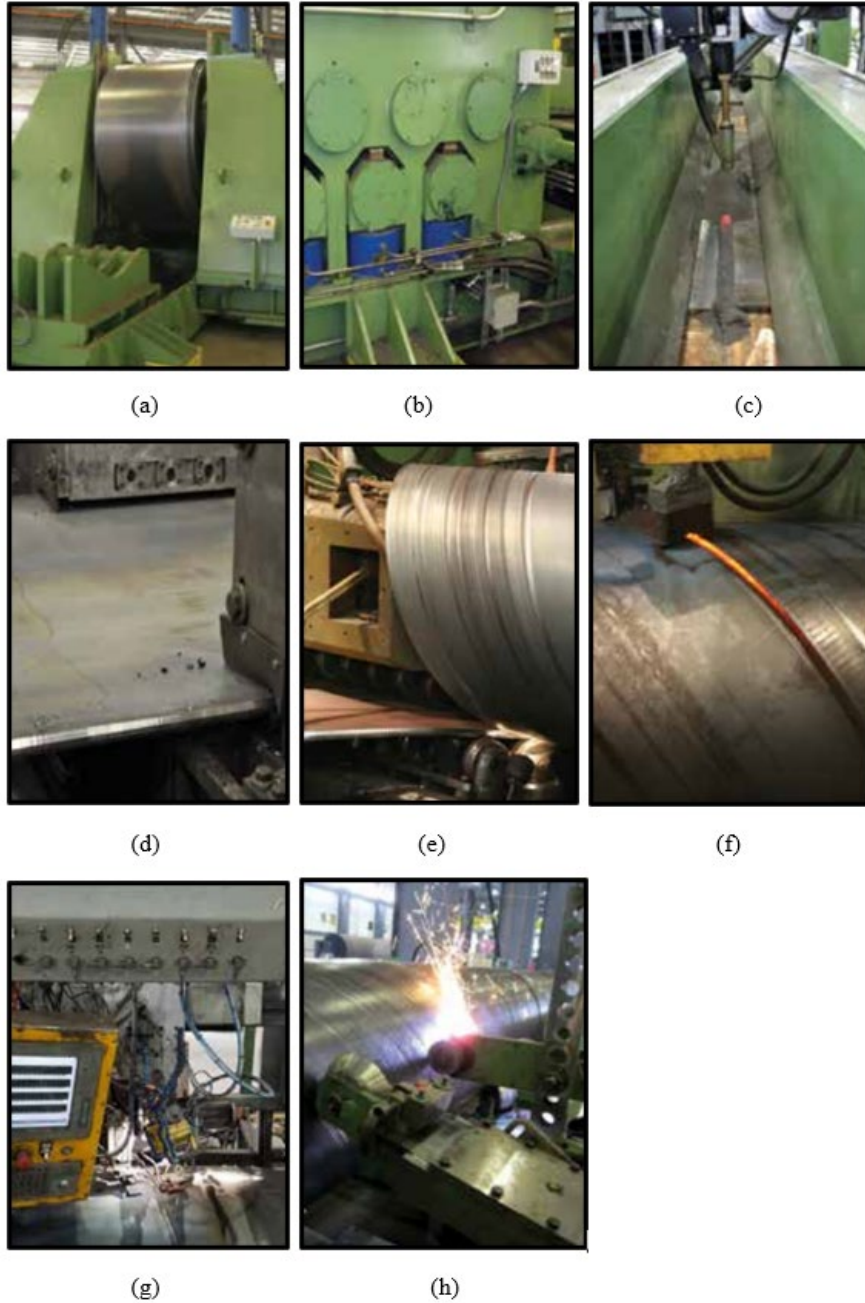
Manufacturing process of spiral weld pipe; (a) Uncoiling; (b) Flattening; (c) Joining of the coil ends; (d) Edge milling; (e) Pipe spiraling; (f) Pipe welding; (g) QC; and (h) Pipe cut-off [7]
